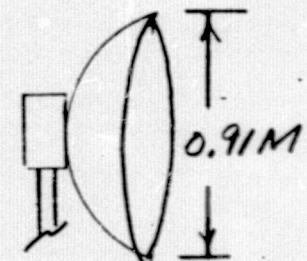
Assembly Level Data Sheet - Ku Band Antenna Assembly
